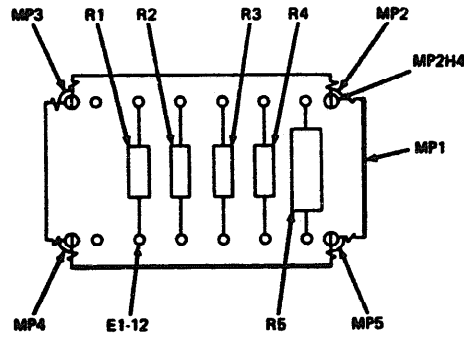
Tube housing assembly 1A3A5A4, parts location.
